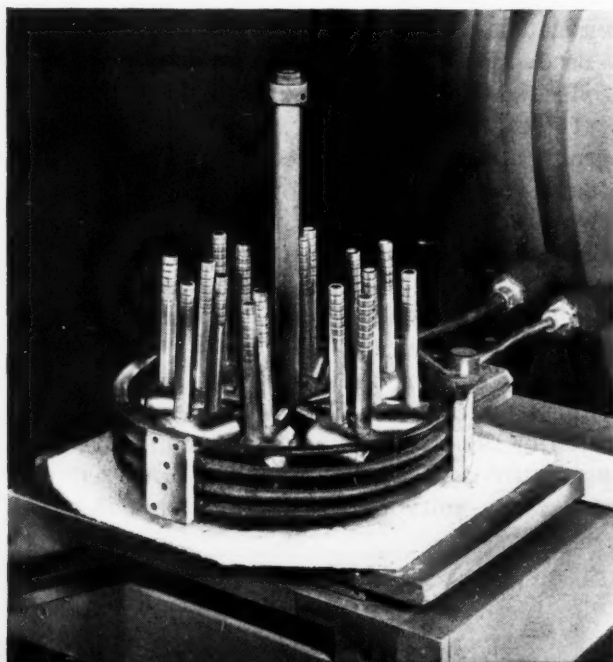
Several Parts can be Heated Simultaneously in the Multi-turn Coil Shown Here. It is Designed for Batch Soldering of Small, Job-lot Pieces in Cases where Accurate Control of the Heat Pattern is Not Necessary
